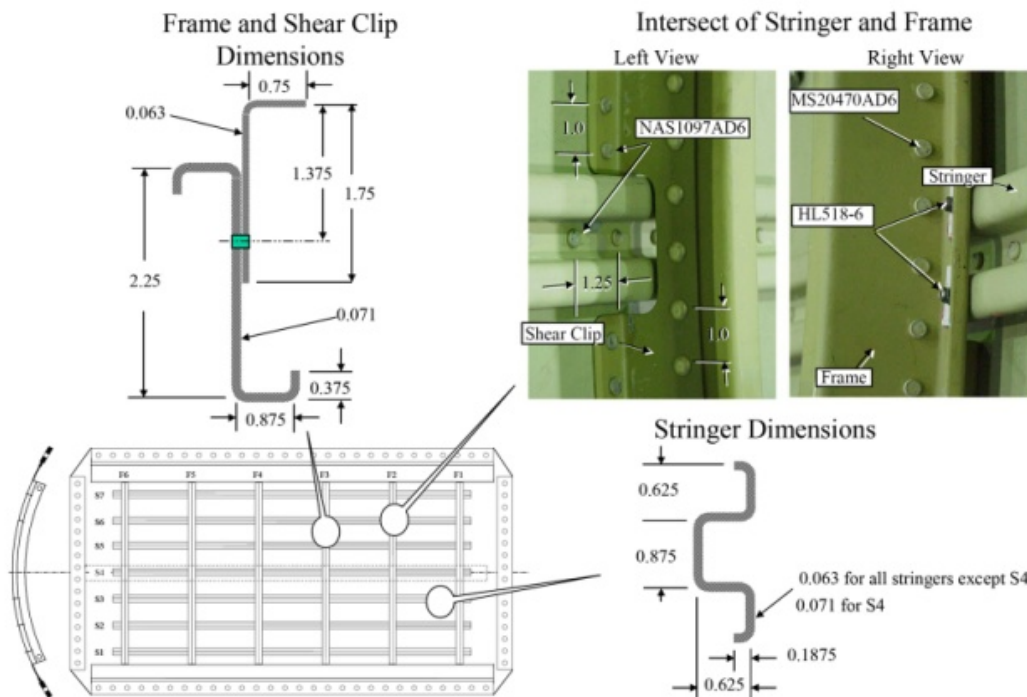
Dimensions of frame, stringer and intersect of stringer and frame, [3].
